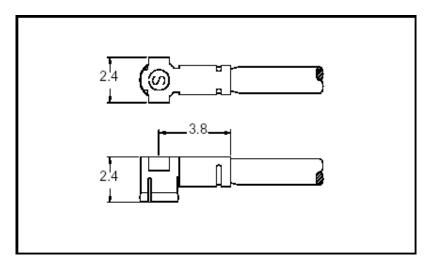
Mechanical Characteristics of Cable Harness Assembly (Units: mm)
